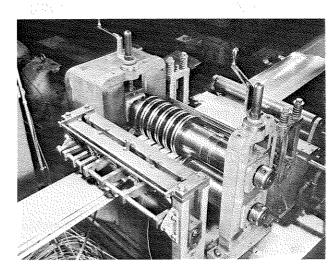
A Typical Stitting Operation. Circular Cutting Blades Can Be Adjusted in Number and Spacing.
